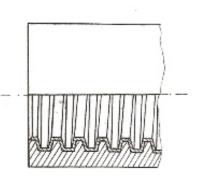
Longitudinal section with partial view of a nut with the thread completely plated.
